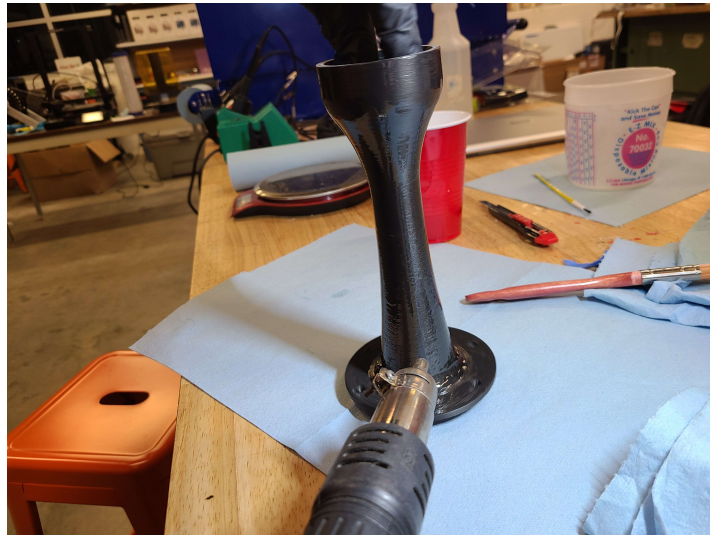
Heat Gun used to Remove Air Bubbles from Epoxy coating
